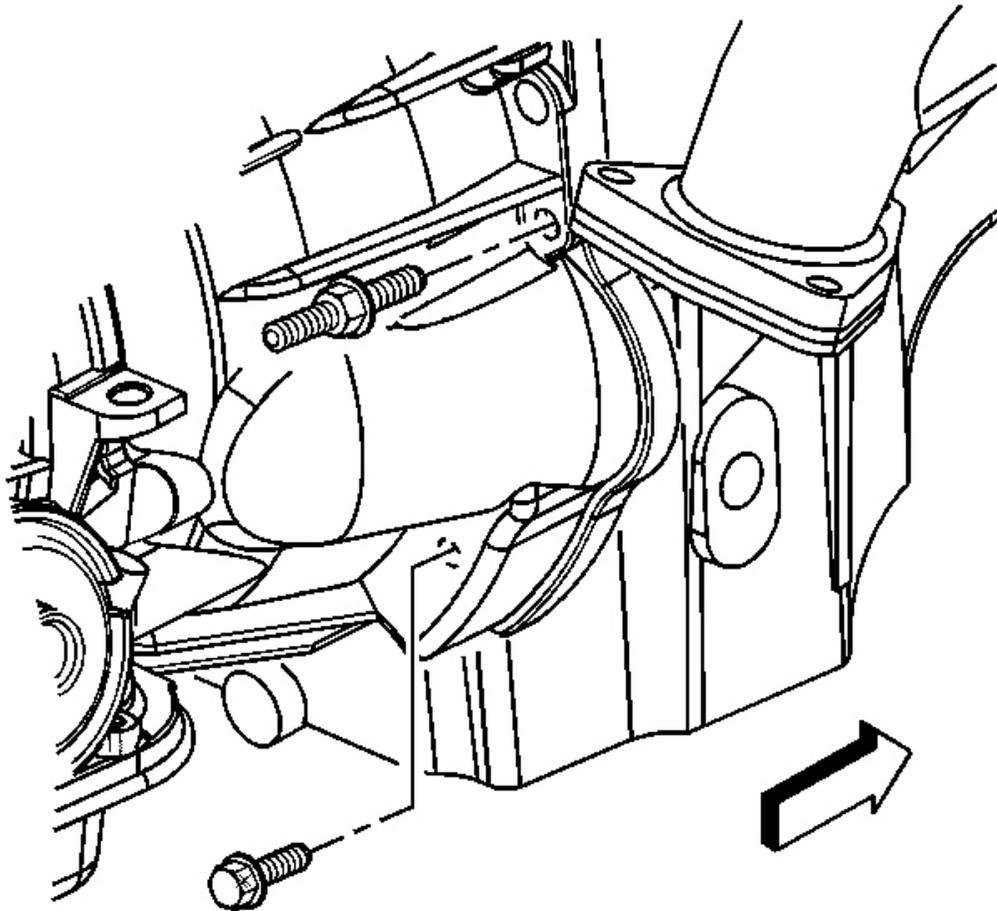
Identifying Stud & Bolt Securing Transmission To Engine
